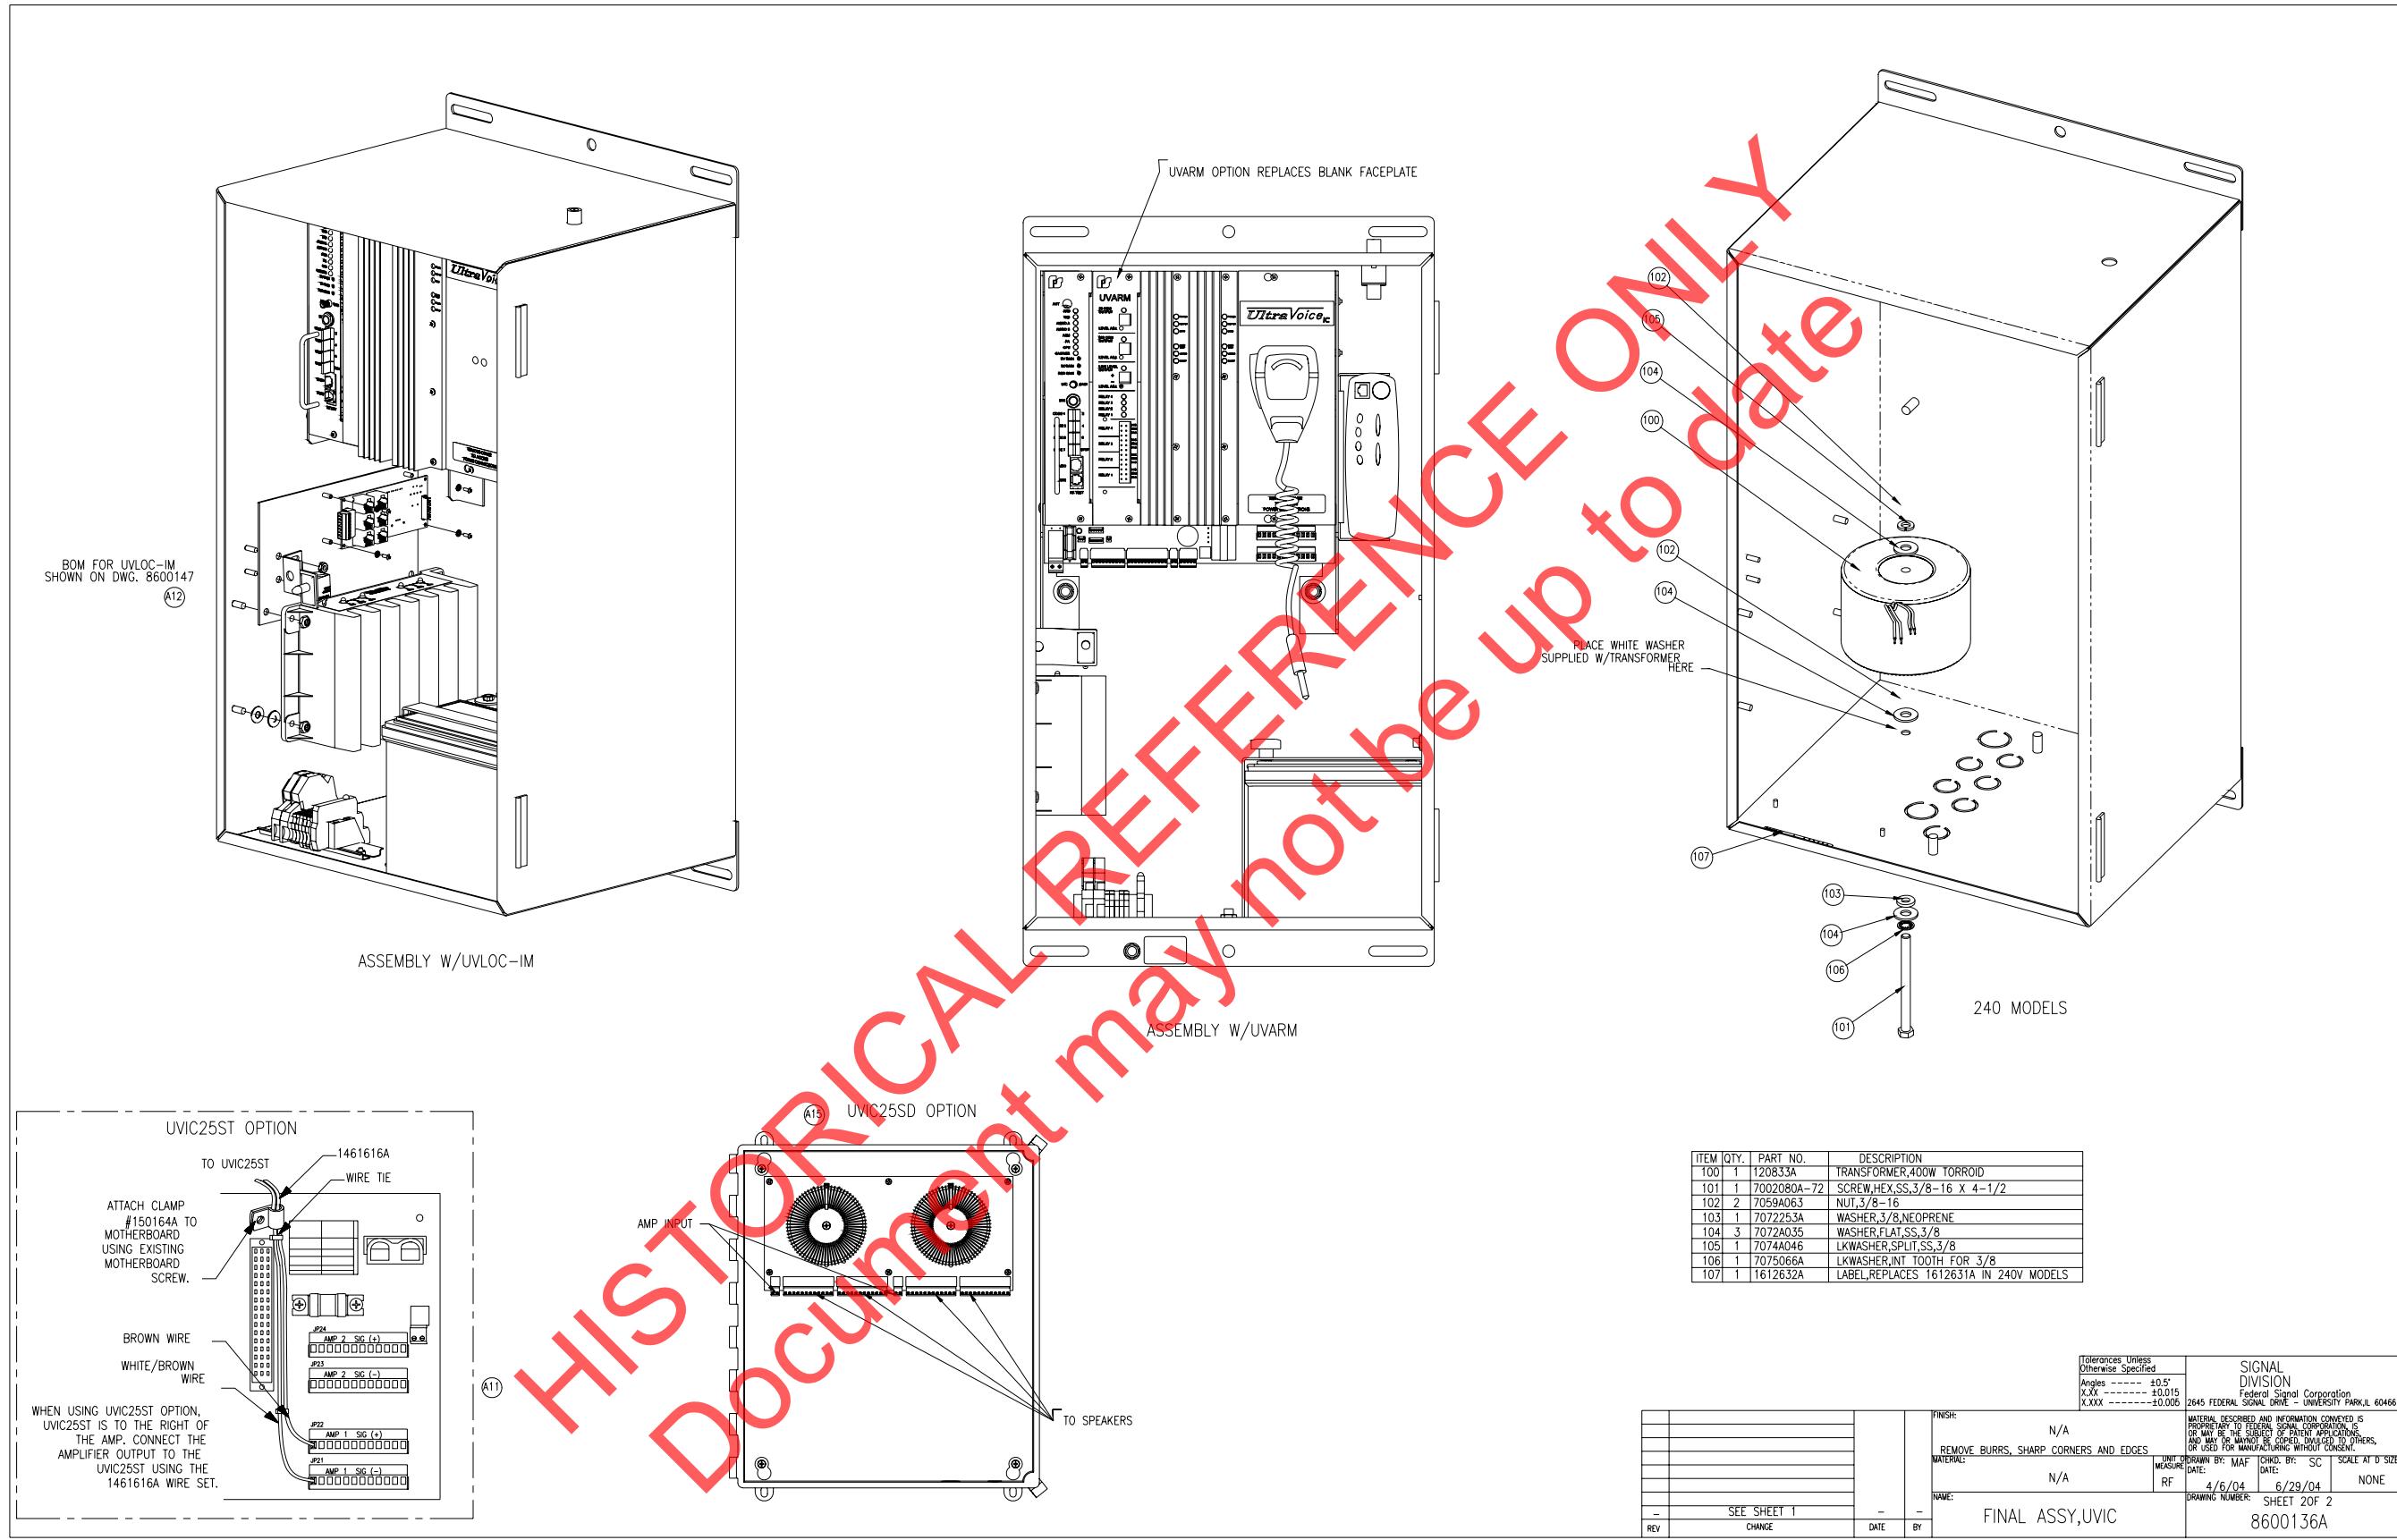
UVIC Final Assembly and Parts List (Page 2 of 2)
